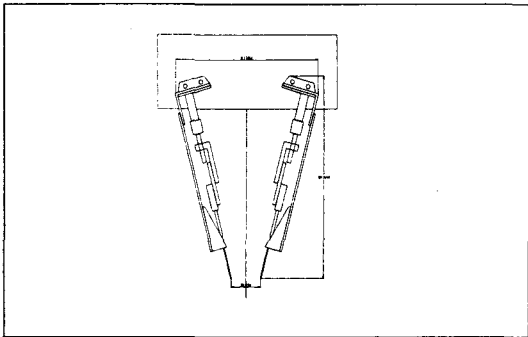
Schematic drawing of the angled-cylinder type gripper.
